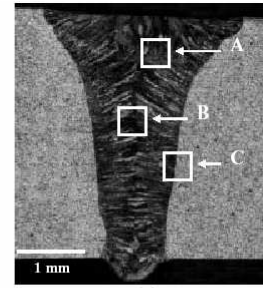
Details of cross-sectional metallographic views of the solution-pretreated weld after EBW with welding parameter D. (OM micrograph)
